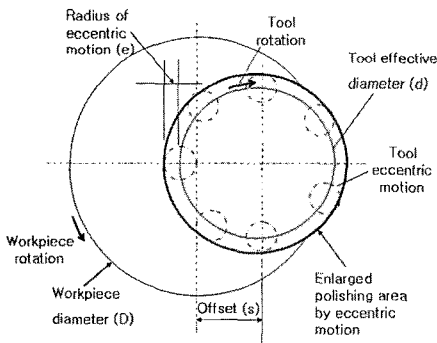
A suggested tool mark removal method by reverse-rotational eccentric motion
